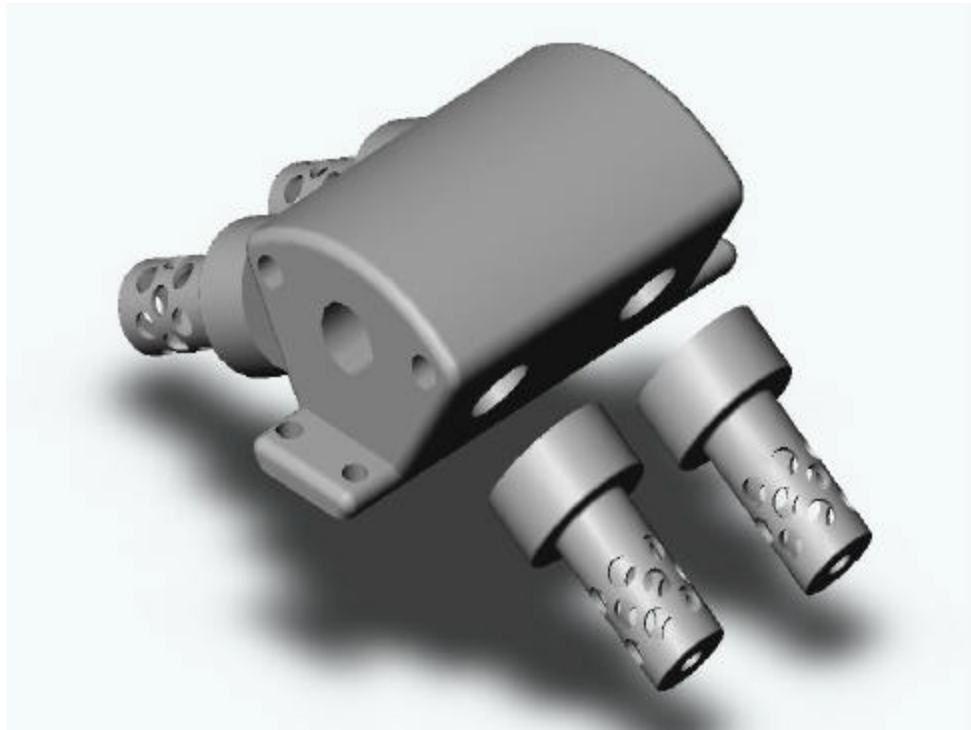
Assembly of Initial Prototype for Manifold and Rat Subcutaneous Loading Chambers
